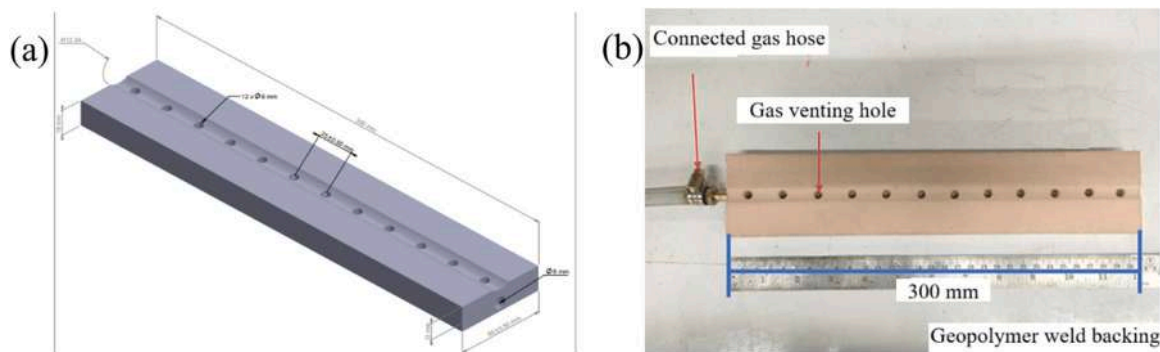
(a) Dimensions and design of the 0.6FM80A10 rectangular geopolymer weld backing (b) Geopolymer weld backing with 12 gas venting holes and a connected gas hose.
